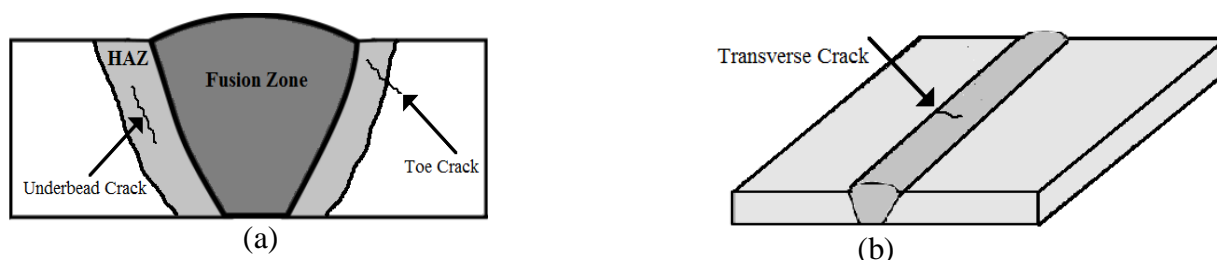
Cold cracks locations in (a) cross section and (b) surface of a weld (inspired from [10])
